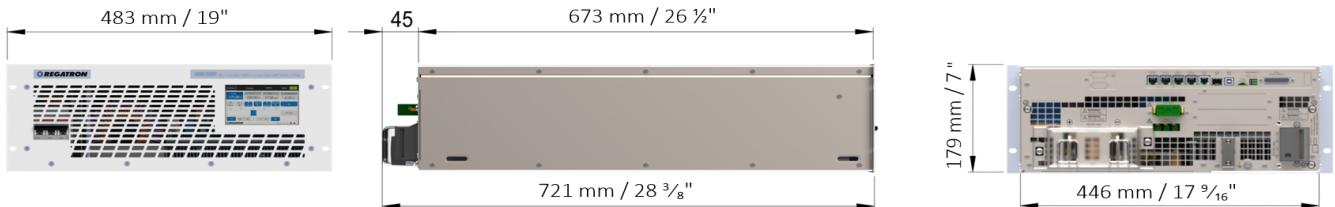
Front, right hand side and rear view. 19-inch module with 4 units in height.
